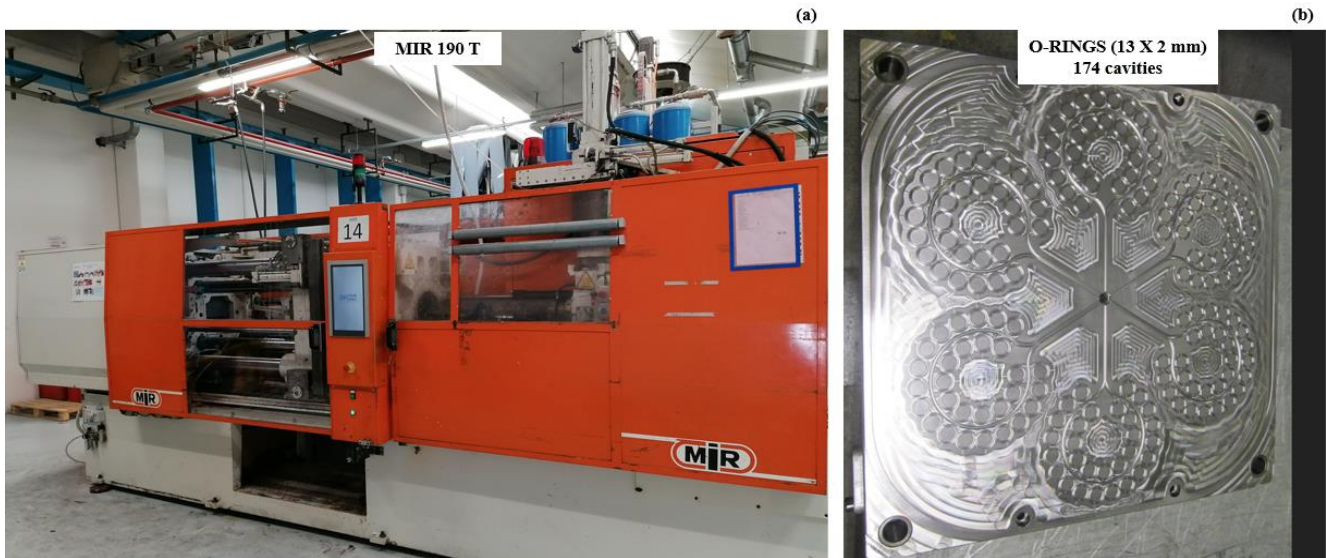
a Horizontal injection molding 190 Ton MIR. b Mold of O-rings (13 x 2 mm) with 174 cavities.
